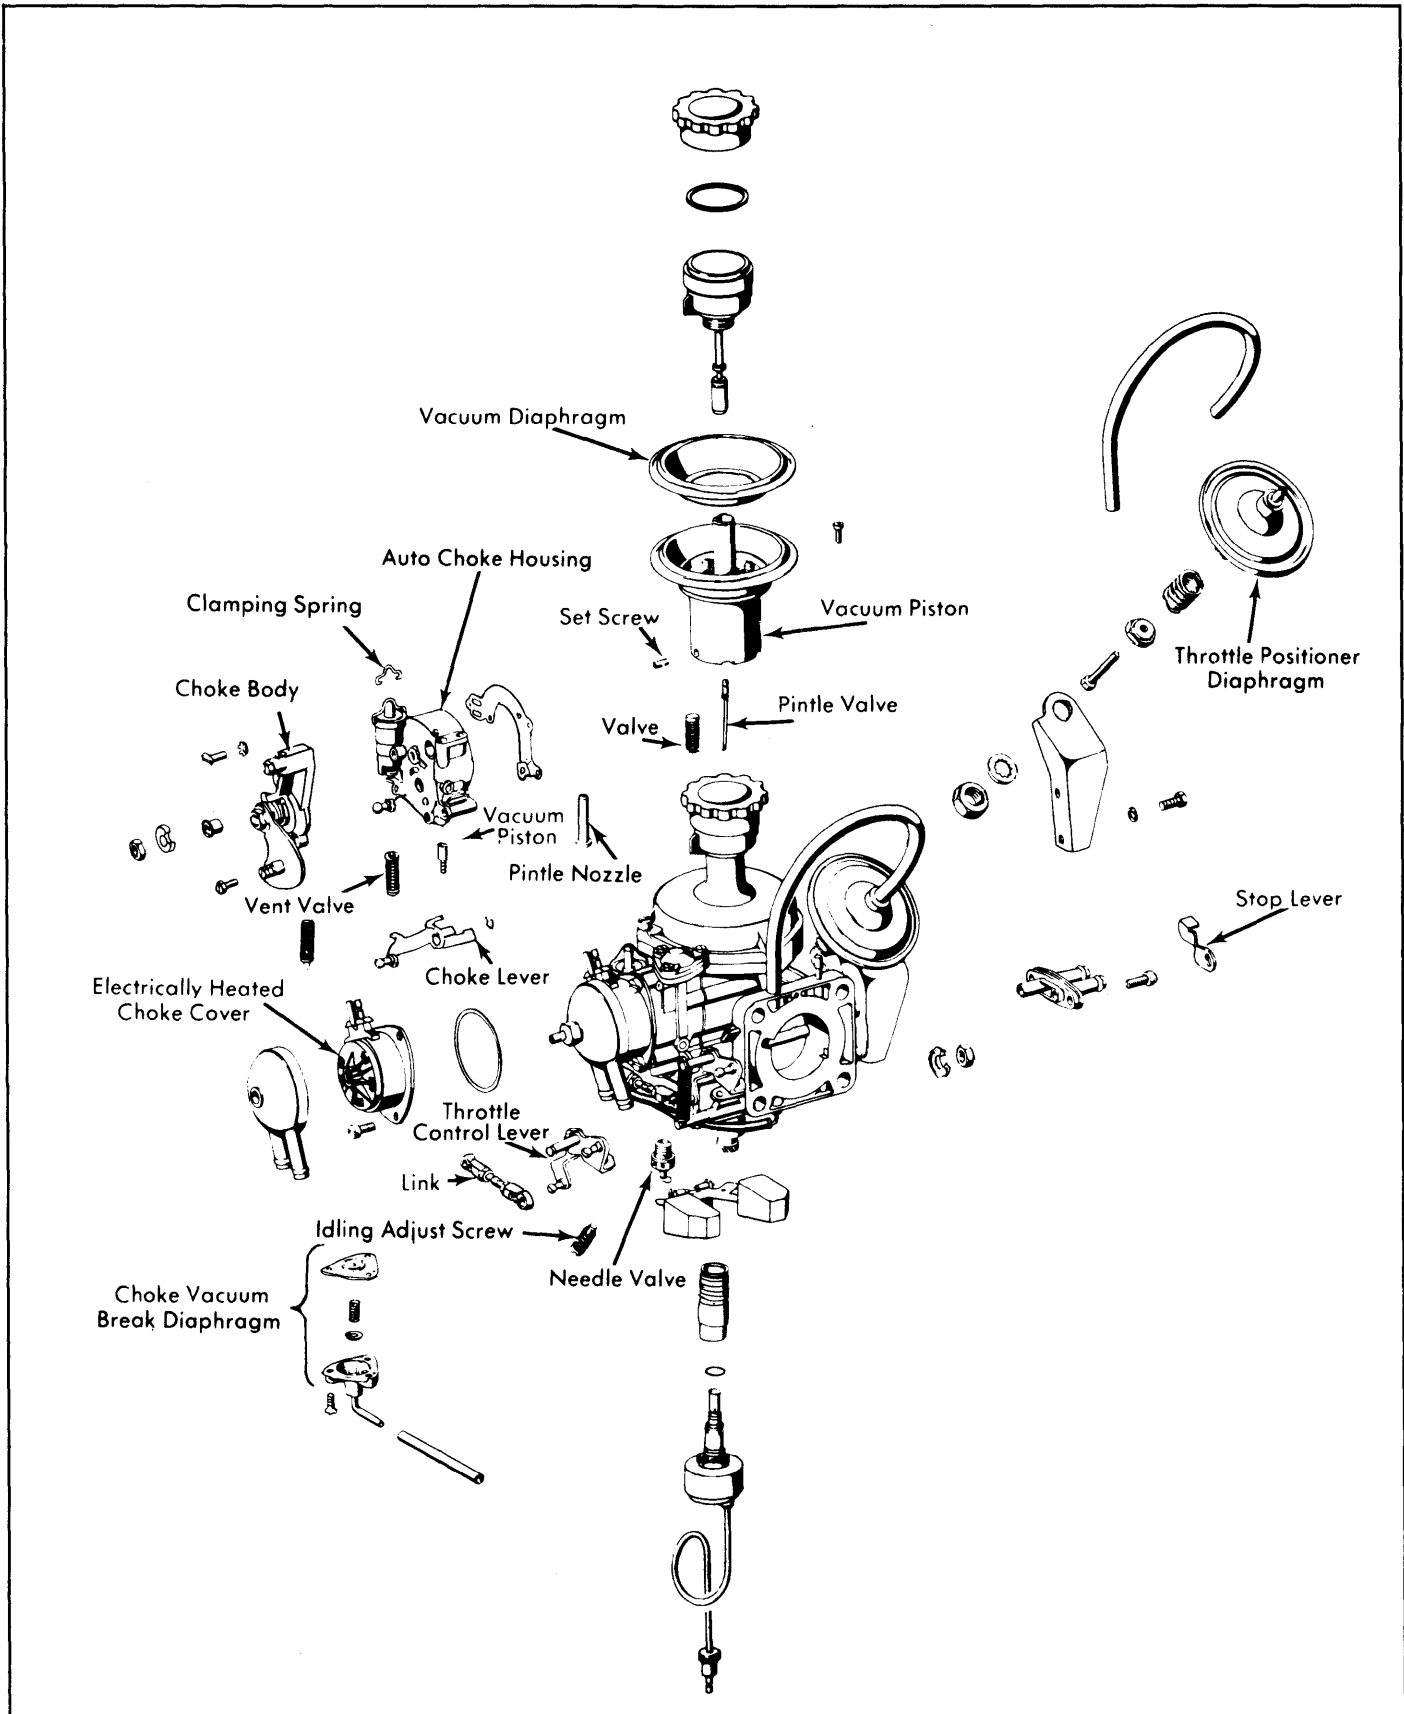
Exploded View of Zenith-Stromberg CD4T Carburetor
